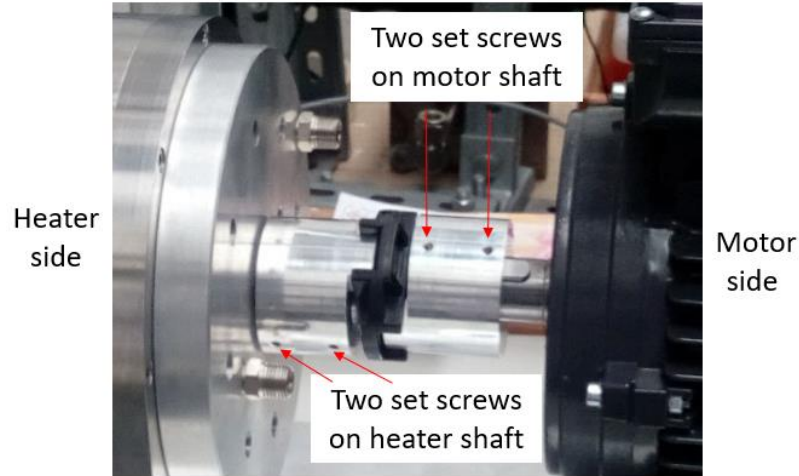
The coupling between the heater and the motor by hubs and coupling torque disk.
